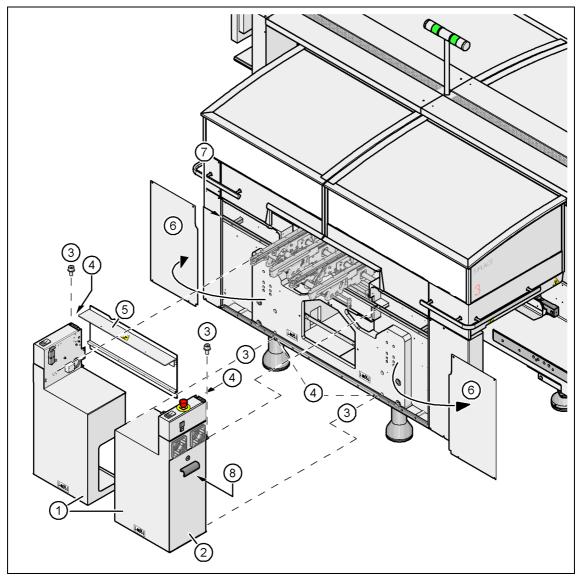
8 Fitting the extension kit on the PCB output side
